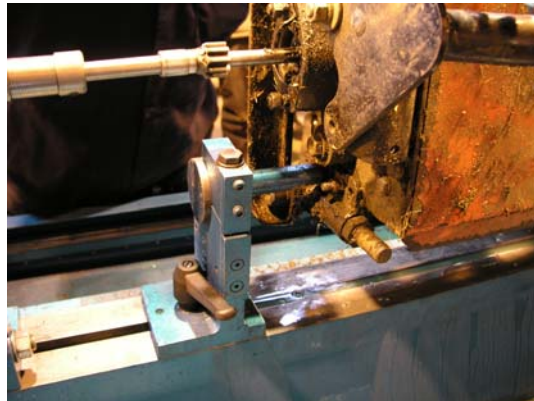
Fixed mounting bracket viewed from the rear of the machine
